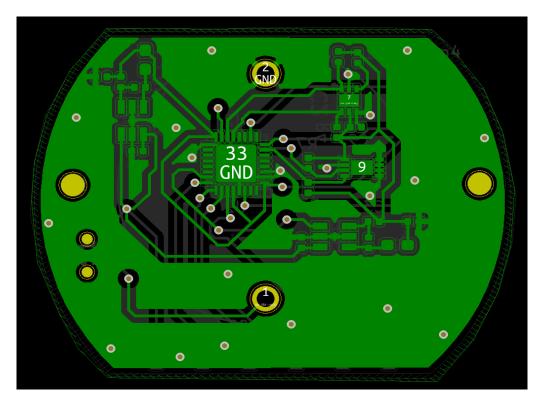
PCB Bottom Layer. It includes tracks, holes, vias, pads and ground plane.
